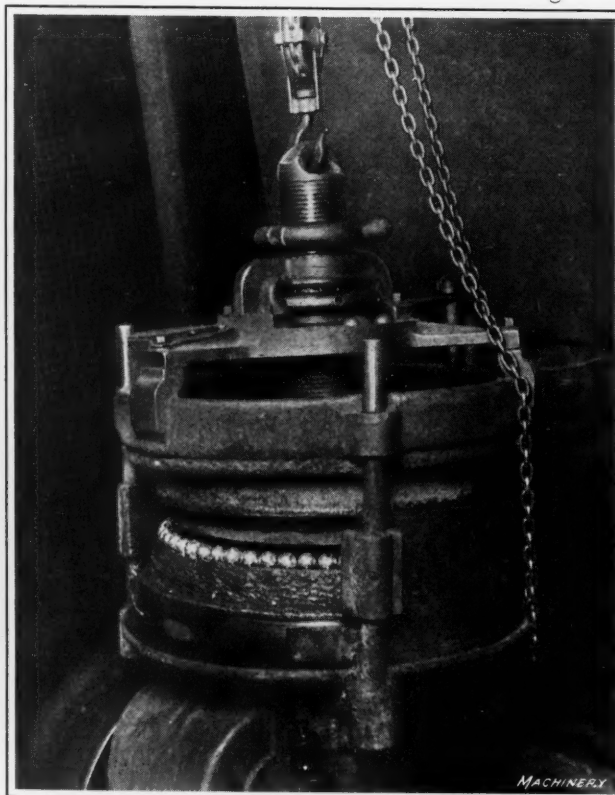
Specially Designed Ball Grinding Machine, showing a Row of Balls after being rough-ground
